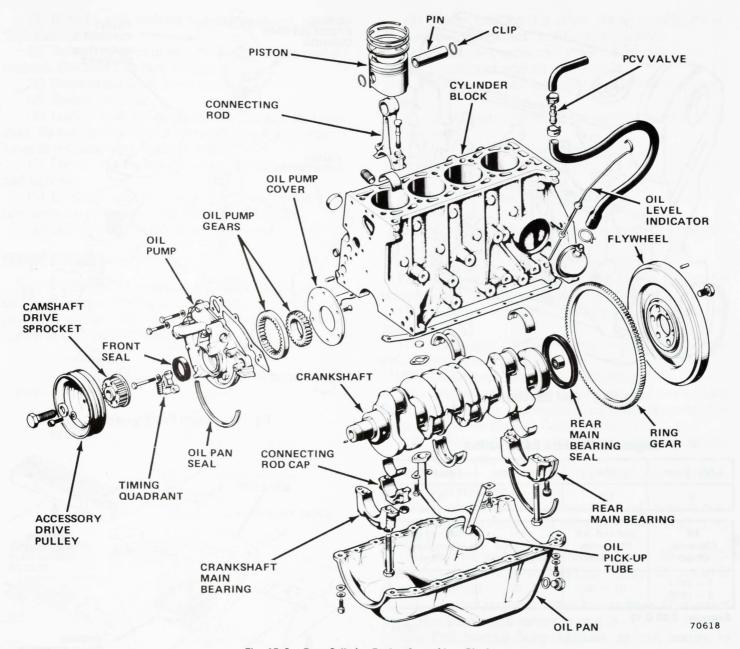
B-2 Four-Cylinder Engine Assembly—Block
